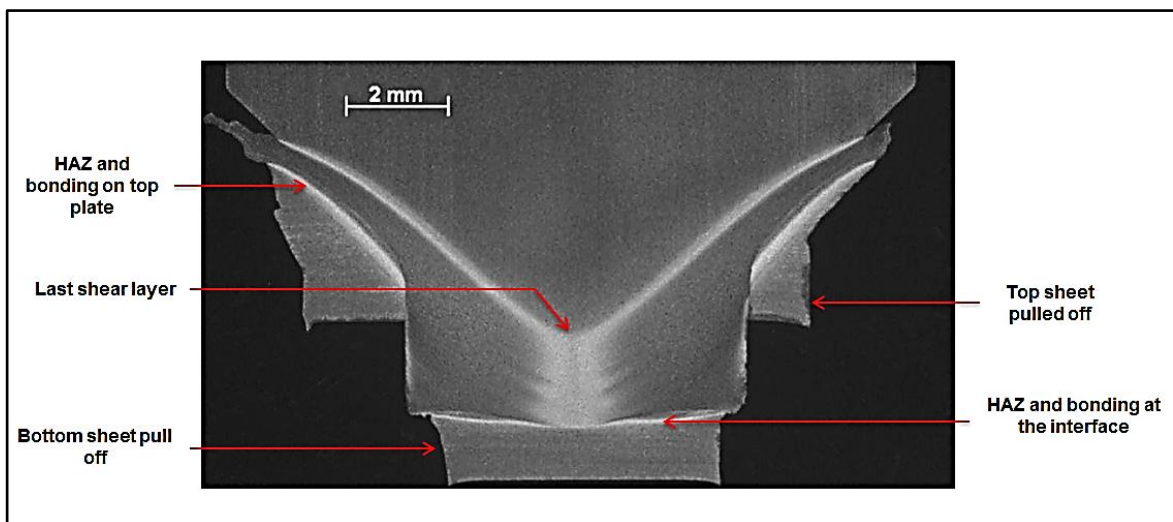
Blind hole 2500rev/min macrograph of pulled off rivet
